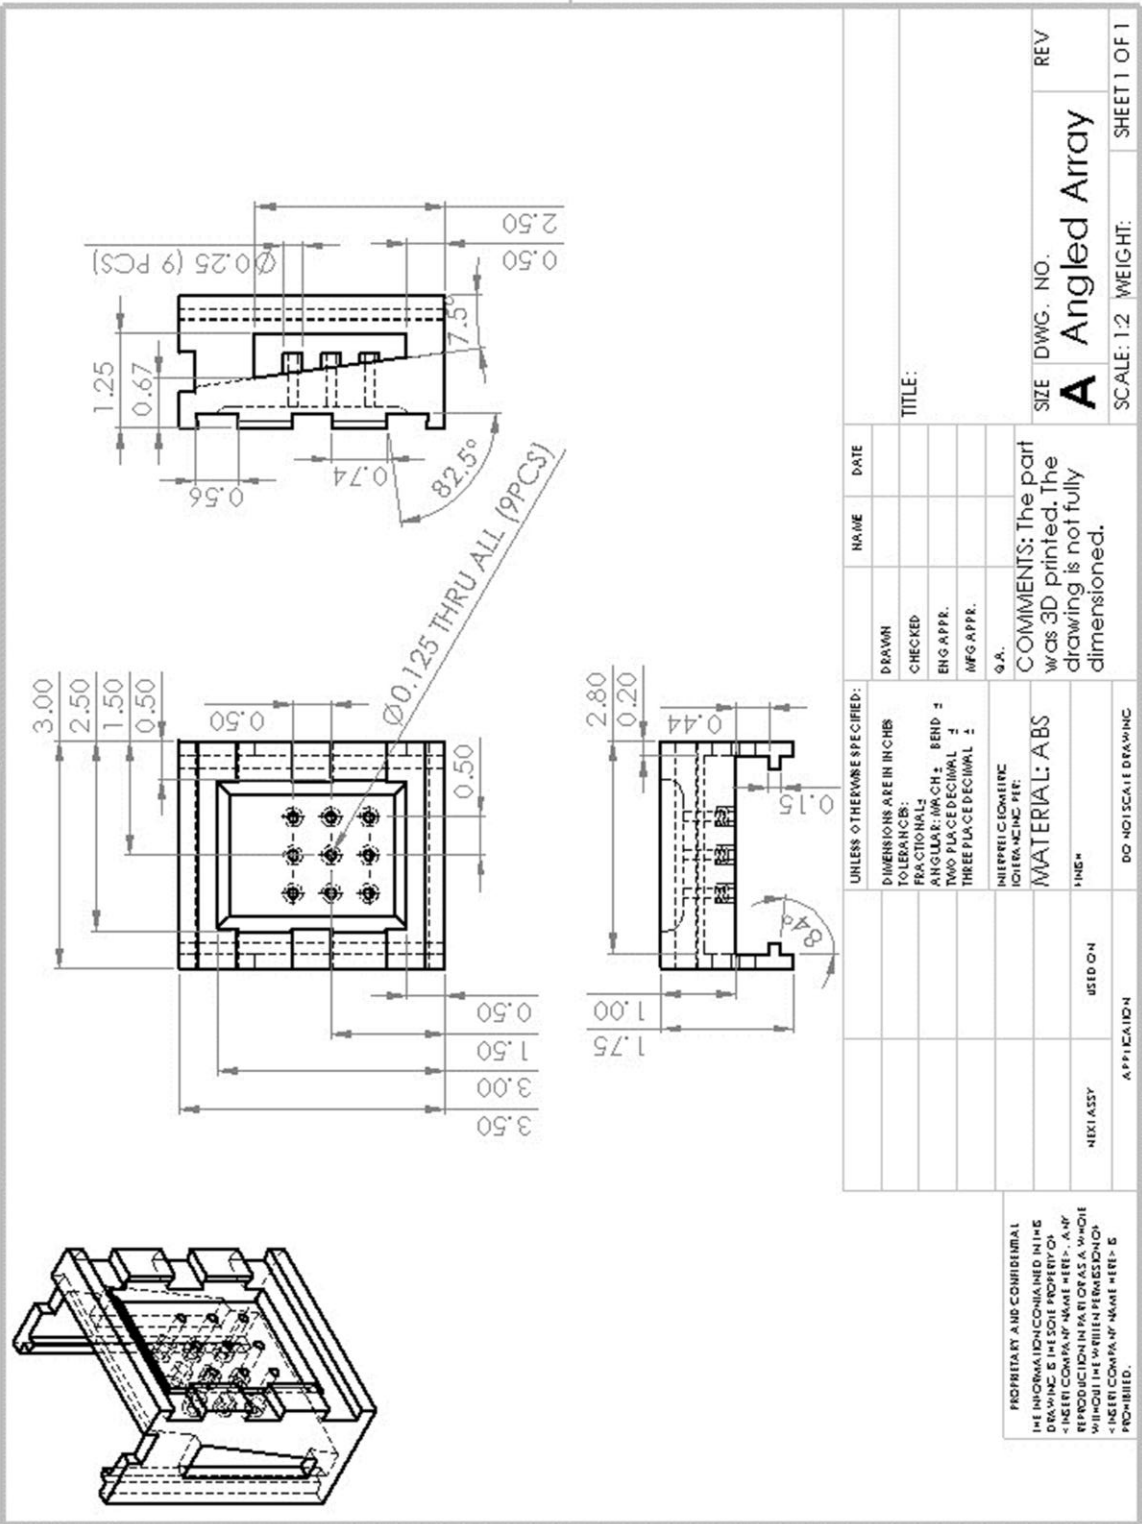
Modular nozzle array with an angled confining wall mechanical drawing
